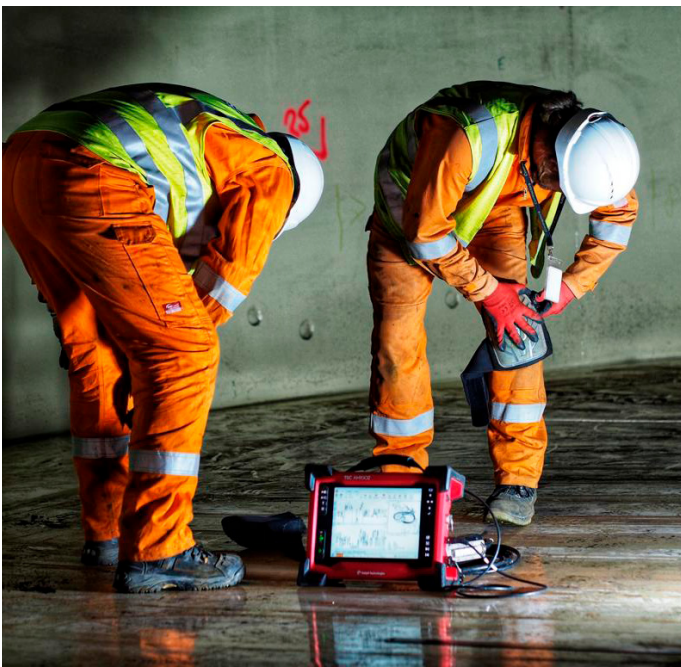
Amigo2 for internal tank weld inspection.
